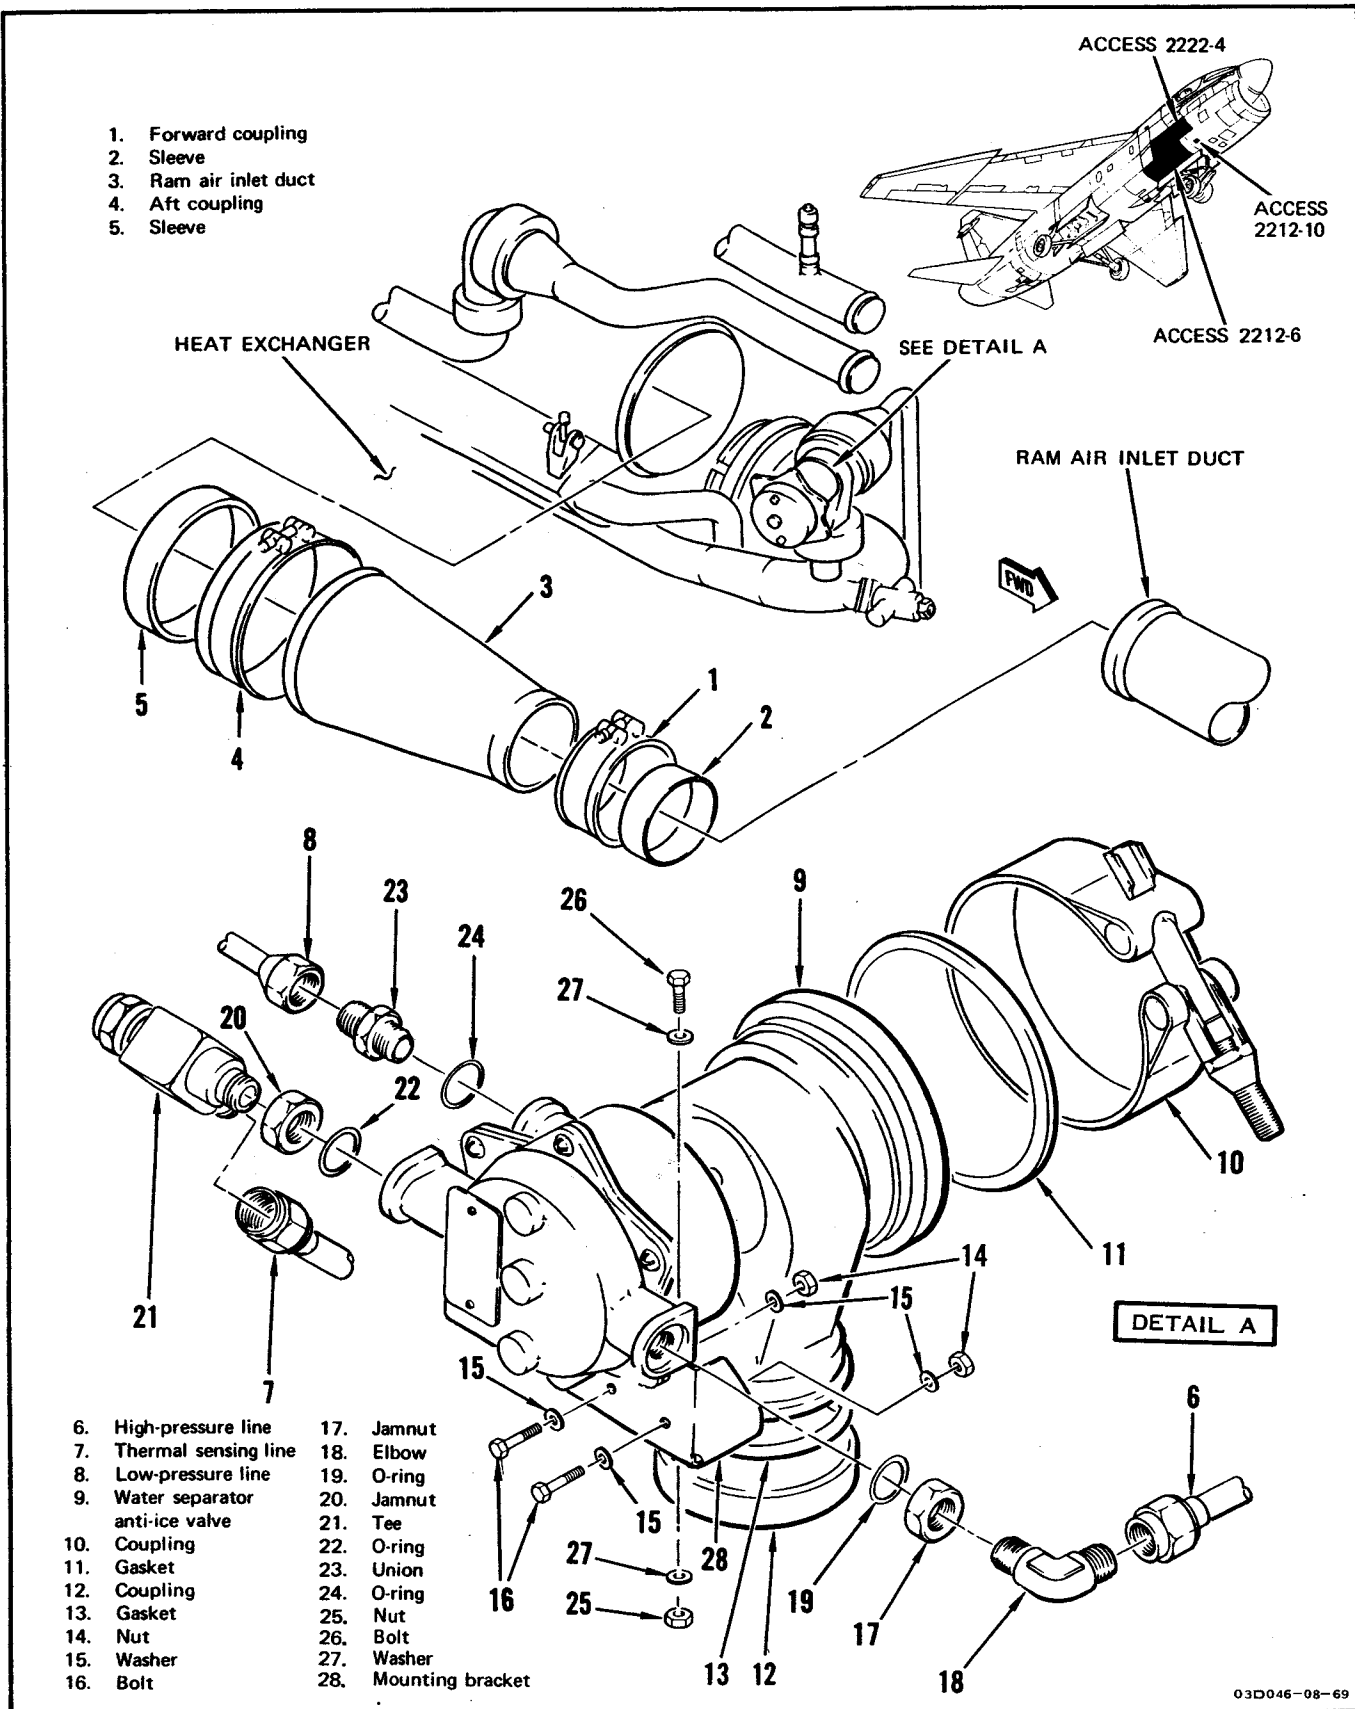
Water Separator Anti-Ice Valve Removal and Installation
